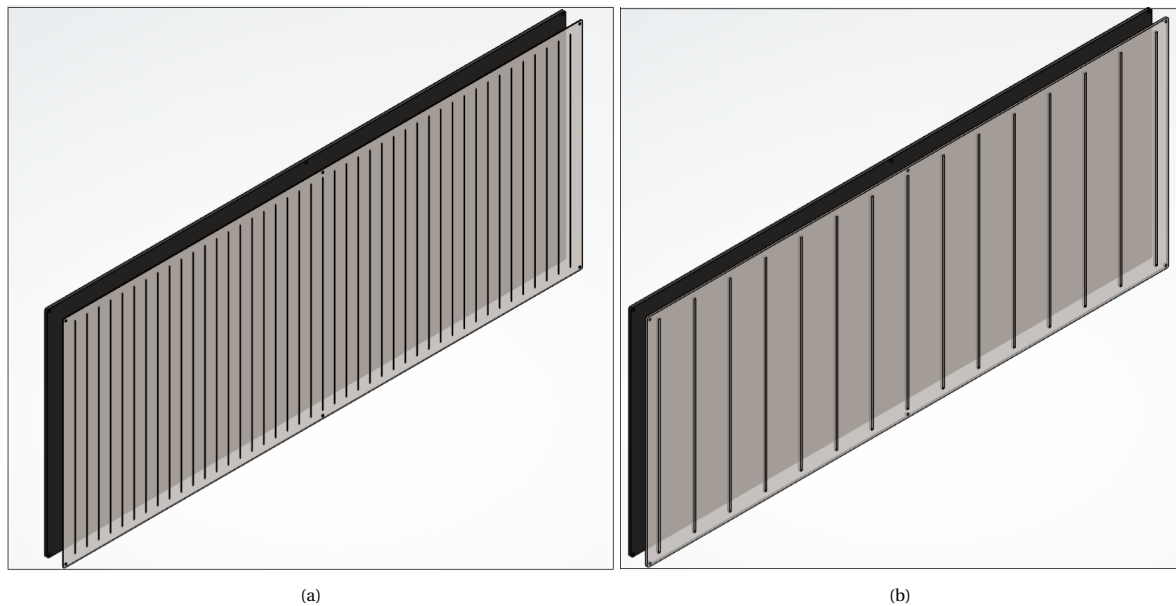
CATIA designs of the grooved plates with a smooth back plate (a) Grooves with medium spacing, G-M (b) Grooves with large spacing and width, G-L
